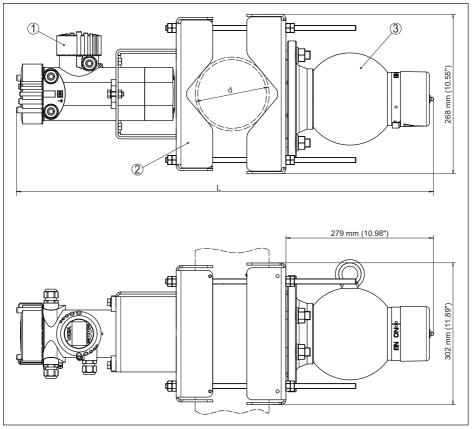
Mounting bracket with horizontally mounted sensor (with VEGASOURCE 31, 35)
